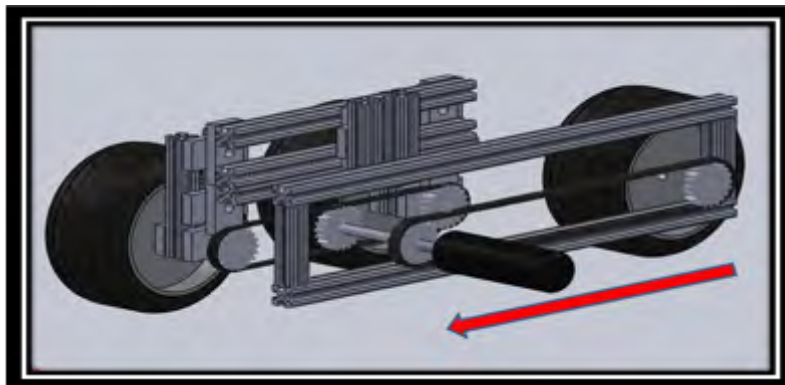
Robot pulley system used to move one side of symmetrical movement of all wheels by central wheel moved by electrical motor and measured by encoder.
